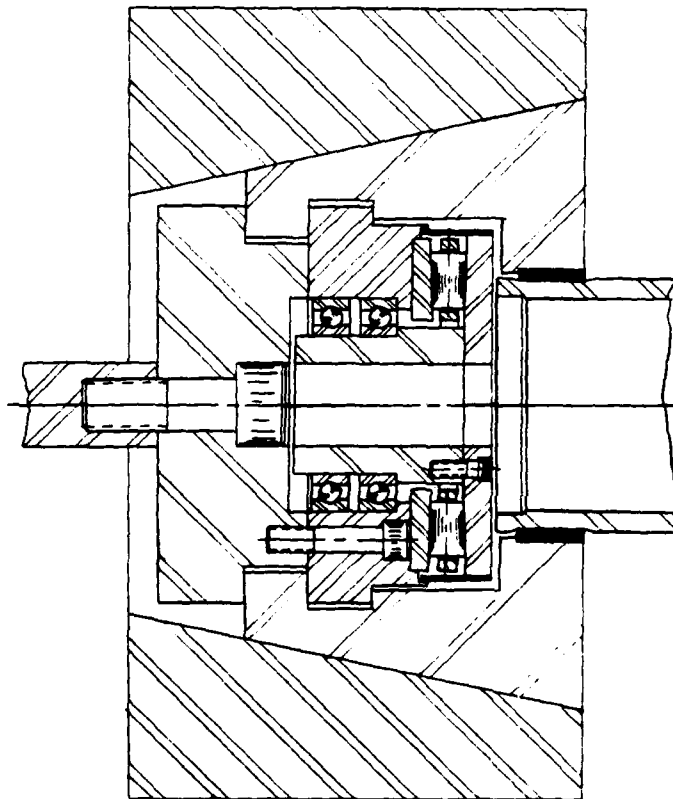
GEOMETRY OF COLLET OF INERTIA WELDER
